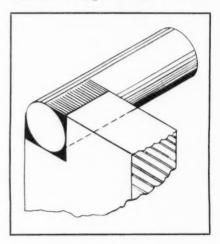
Drawing showing conventional methof welding round steel support to jig plate.
